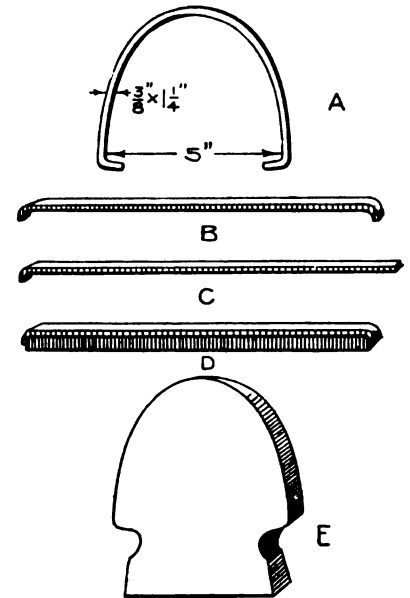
DIE FOR BENDING A SPECIAL PIECE AND THE PROCESS.
